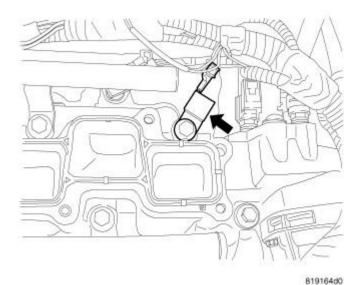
CAPACITOR LOCATION Courtesy of CHRYSLER LLC
